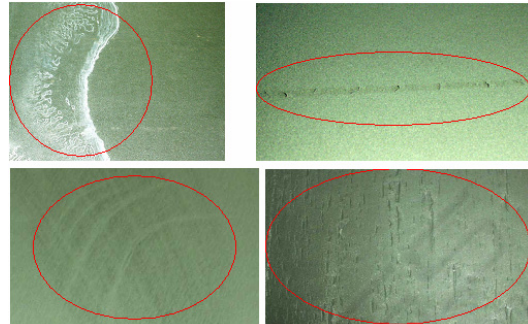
Surface defects. Pattern-type and roughness-type surface defects (rust, coat-less...).
